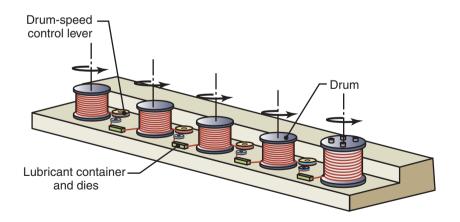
An illustration of multistage wire drawing typically used to produce copper wire for electrical wiring. Shown is a five bull block configuration; wire drawing machines can incorporate 15 or more drums, depending on the material and wire size. *Source:* After H. Auerswald.
